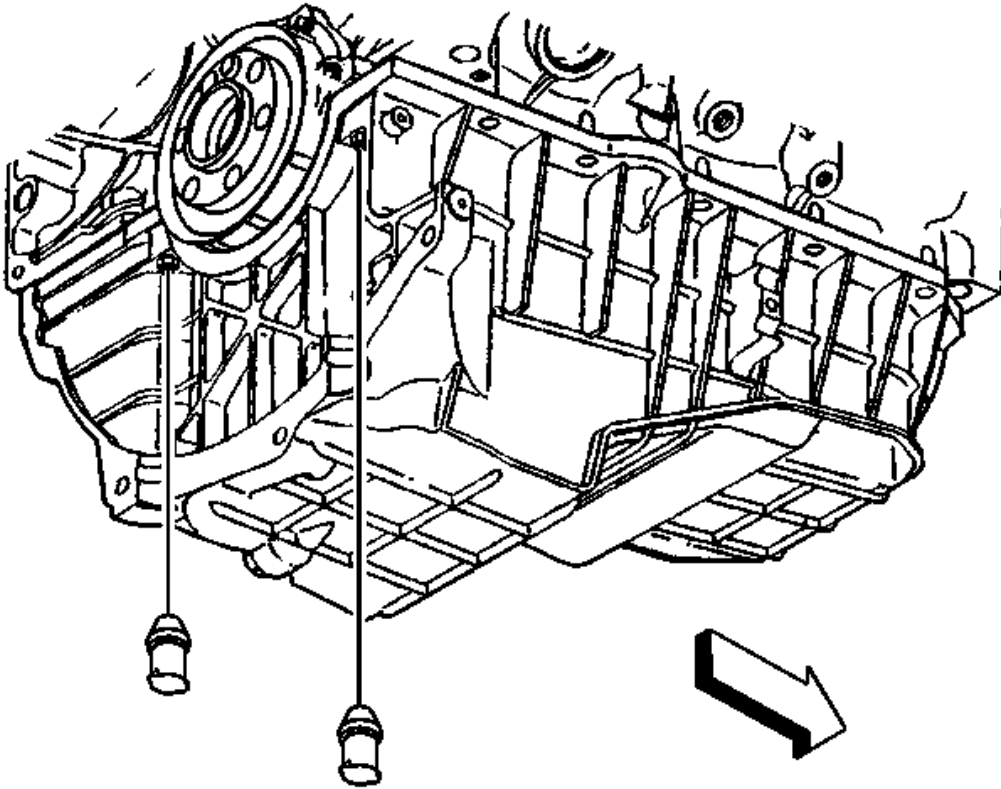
Expanded View Of Oil Pan Rear Nuts Access Plugs
